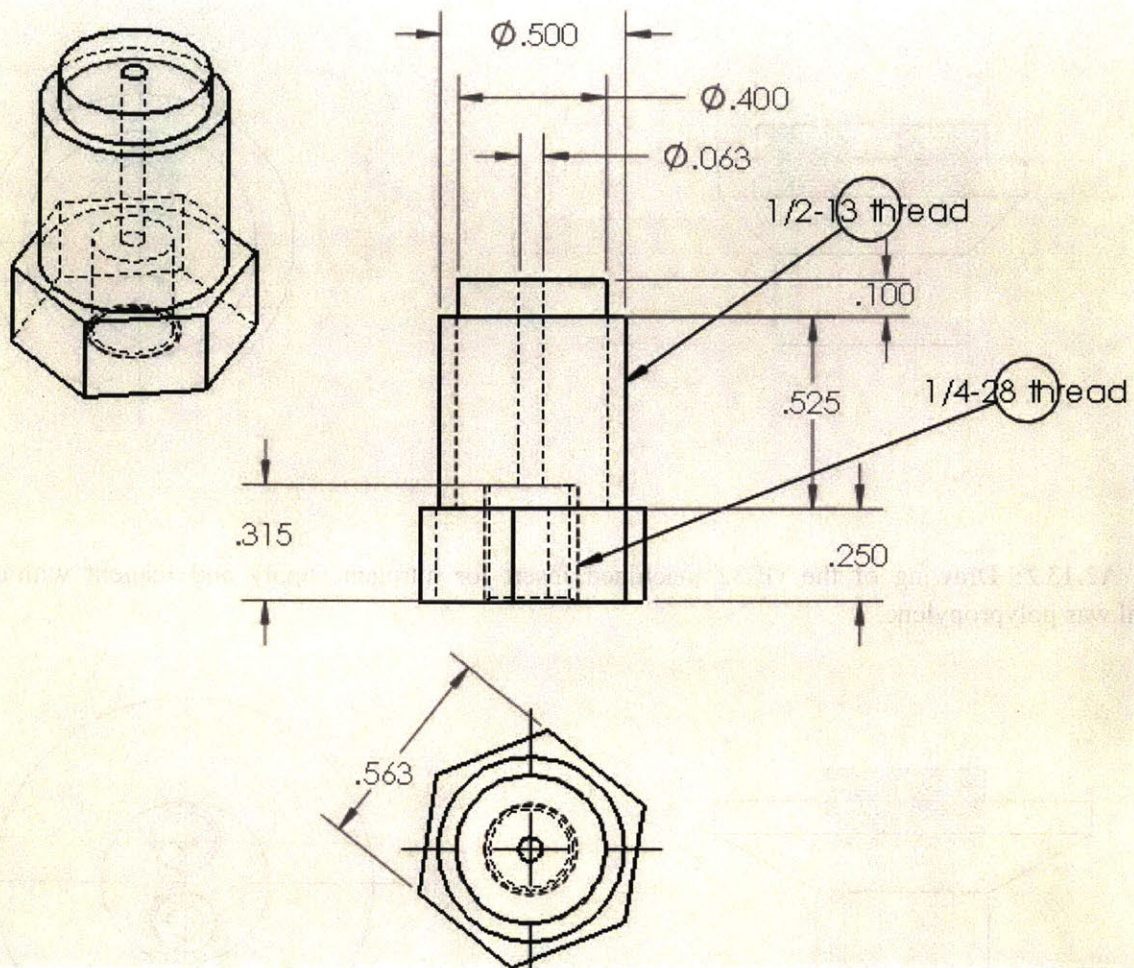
Drawing of the GL45 machined insert for nitrogen supply and reagent withdraw. Material was polypropylene.
